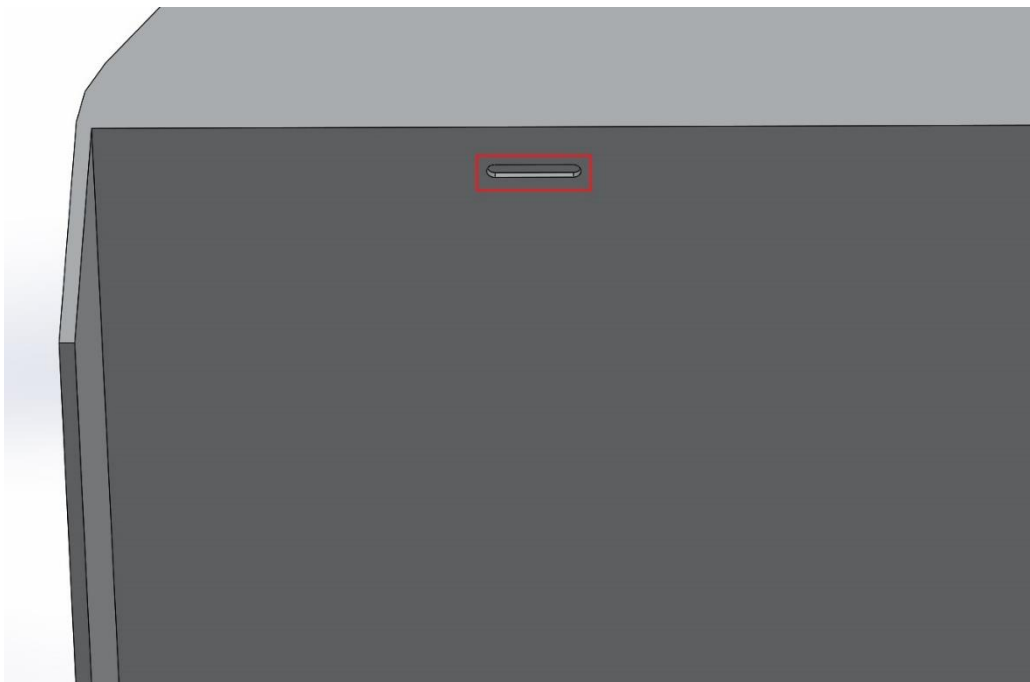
Sliding screw holes at the bottom surface of air guide.
